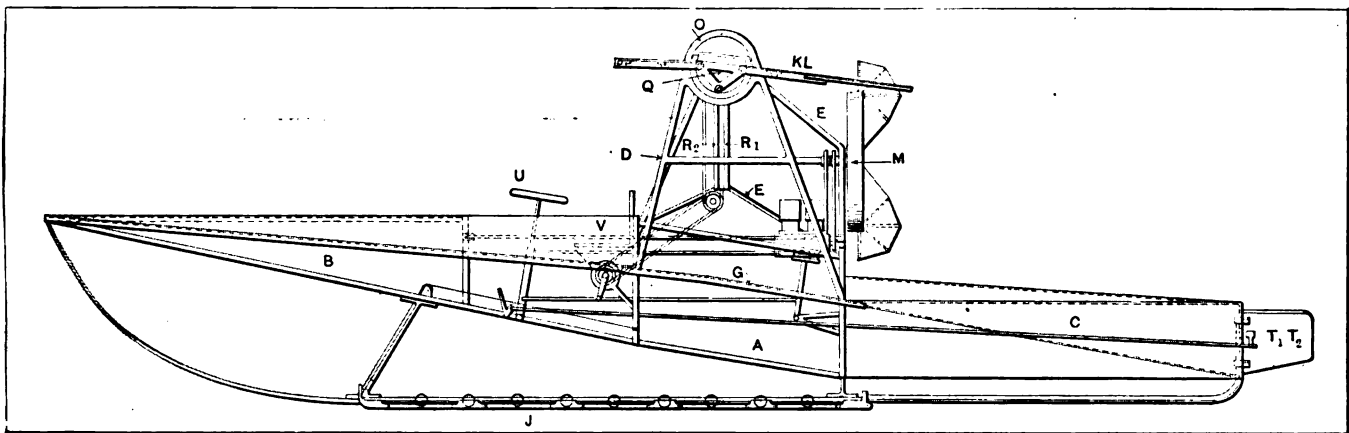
Side view of machine with large upper adjustable wings and smaller fixed lower wings. A, body; B, prow; C, tail; D, left wing support; E, central control base; F, right wing support; G, H, lower wings; J, skid; KL, upper wings; M, propeller; N₁, N₂, control levers; O₁, O₂, guard over trunnioned bearing ring; P₁, P₂, stays; Q, triangulated axis of wings; R₁, R₂, central slides; S₁, S₂, motors; T₁, T₂, oblique rudders; U, steering post; V, seat
